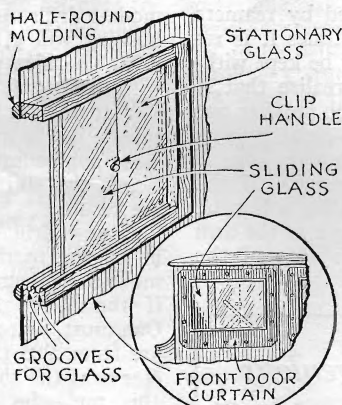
Wooden frame set in curtains of open car can be fitted with glass windows that will open by sliding
